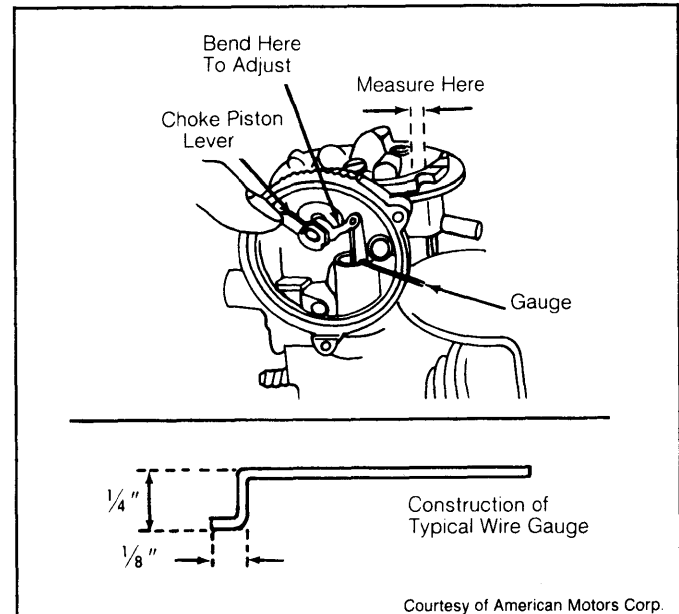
Piston Type Choke Plate Pull-Down Adjustment
